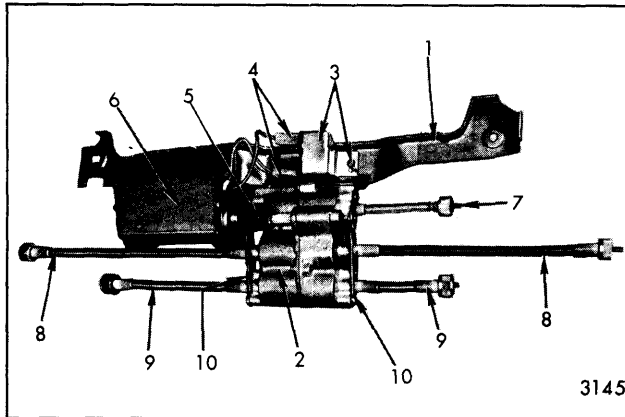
Six-Way Seat Adjuster Motor, Transmission, Cable and Support Assembly
